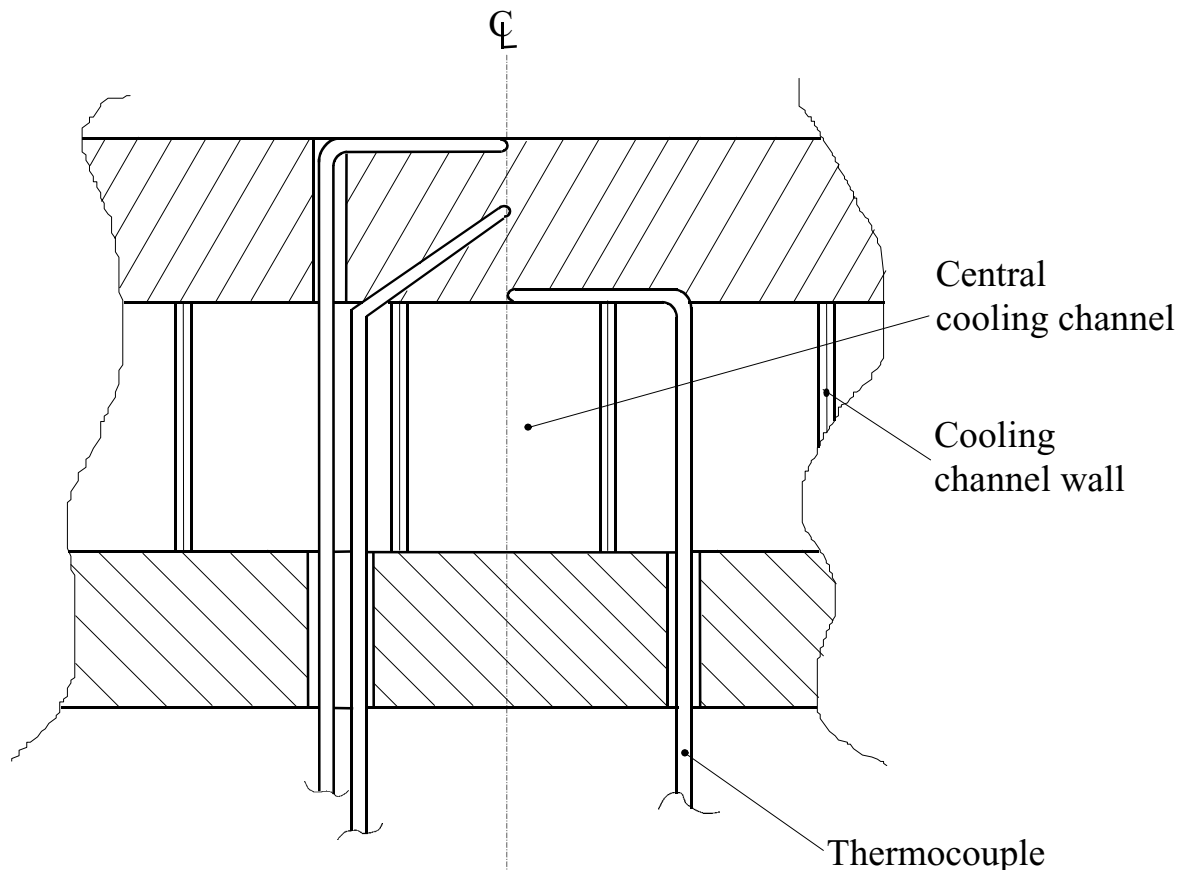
Section of casting plate with three thermocouples through its thickness.
